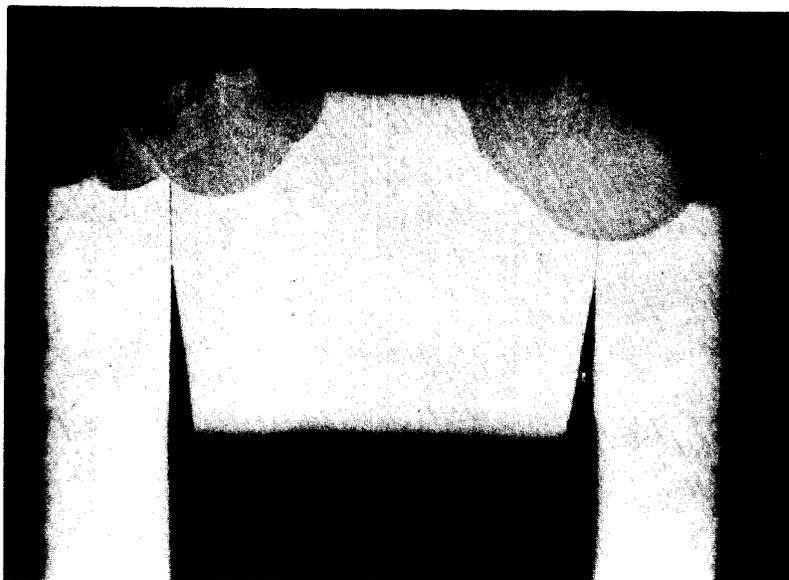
²⁵²Cf SEED ASSEMBLIES
